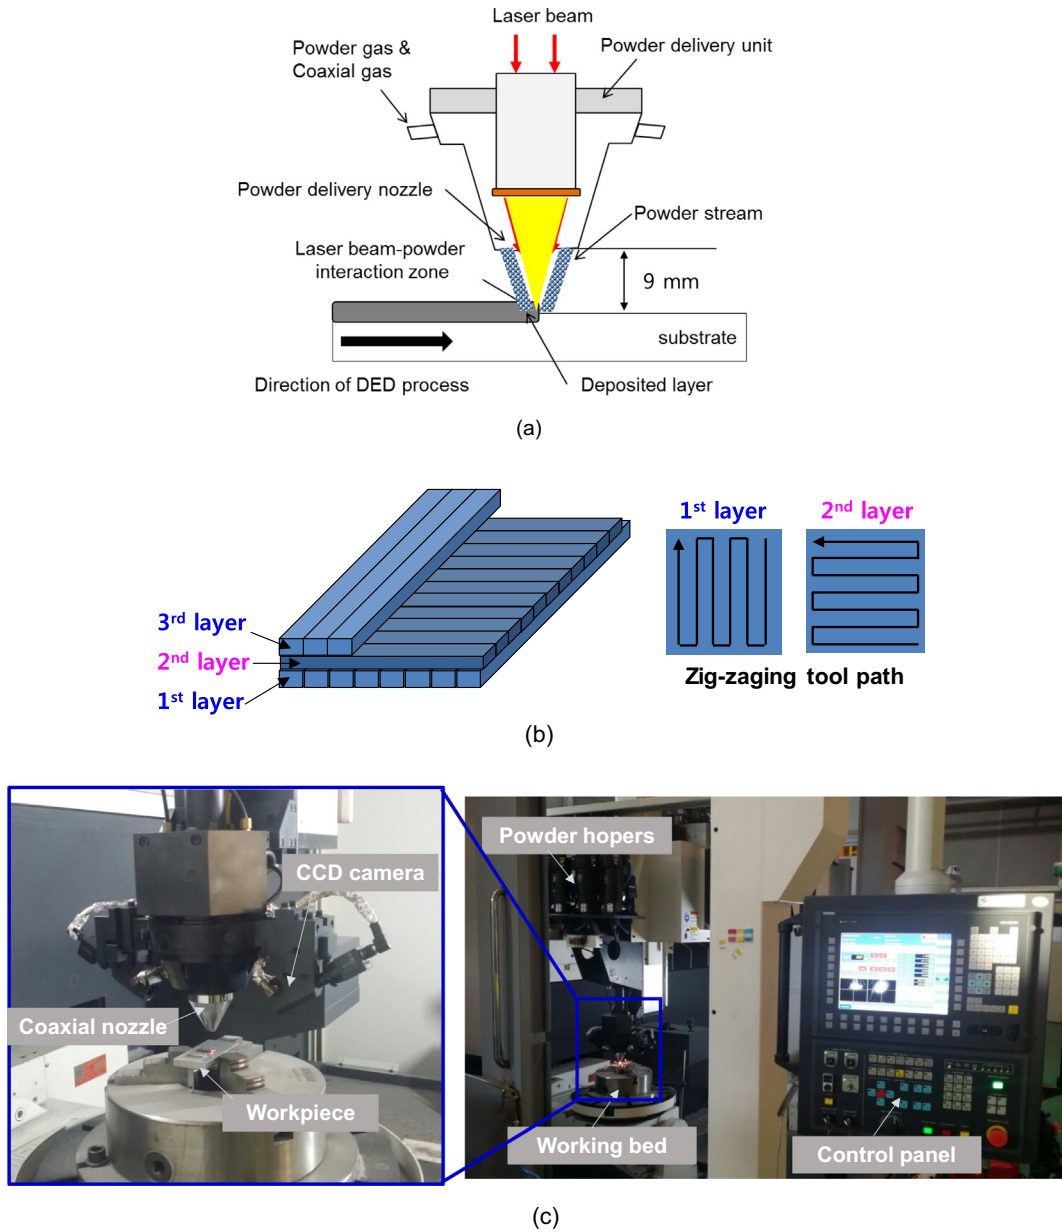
(a) Schematic diagram of the laser metal deposition with the coaxial powder feeder, (b) DED machine, MX3, developed by Insteel Co., Ltd., and (c) tool path.
